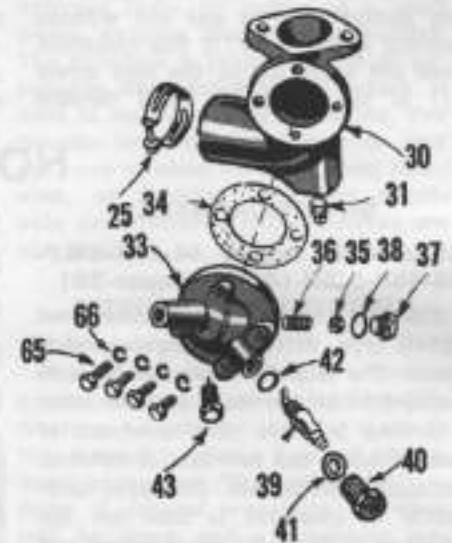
Massey-Harris Diesel engine manifold preheater.
